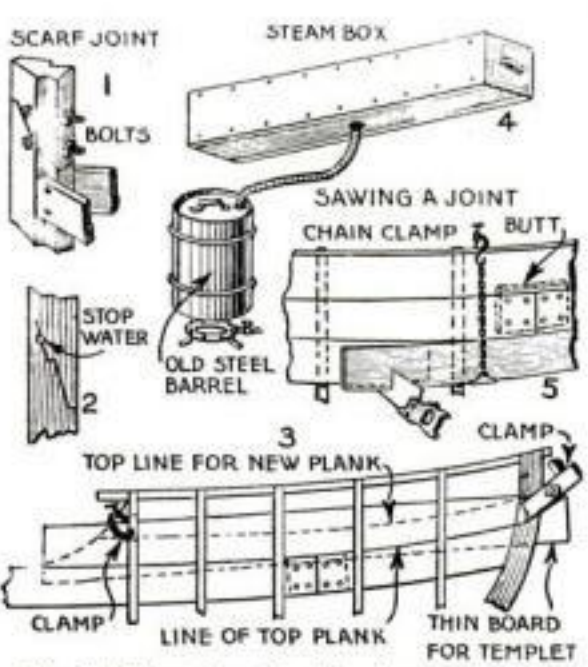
How to splice the stem, make a water-tight joint, construct a steam box, and lay the planking
